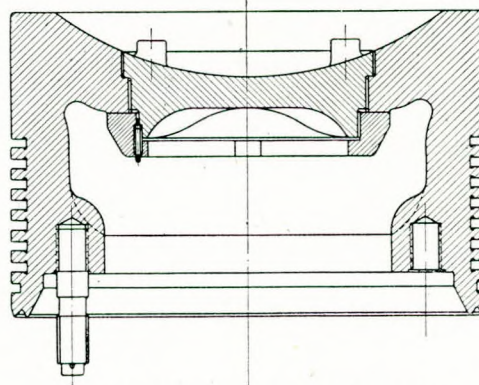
Piston with plug fitted with a counter nut on the inside.
